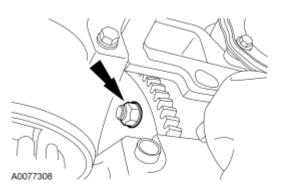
Locating Starter And Stud Bolts Courtesy of FORD MOTOR CO.
